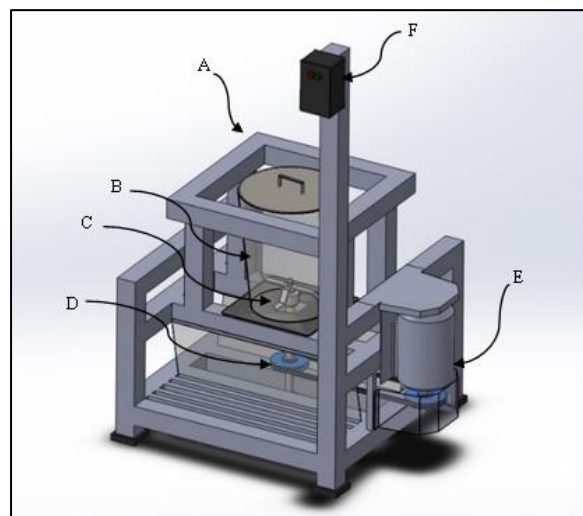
Design model of Agarwood induce inoculum mixing machine. (A) Heavy iron base, (B) Frustum-shaped stainless-steel jar, (C) Mixing blade, (D) Power transmission unit, (E) Induction motor, (F) Control panel.
